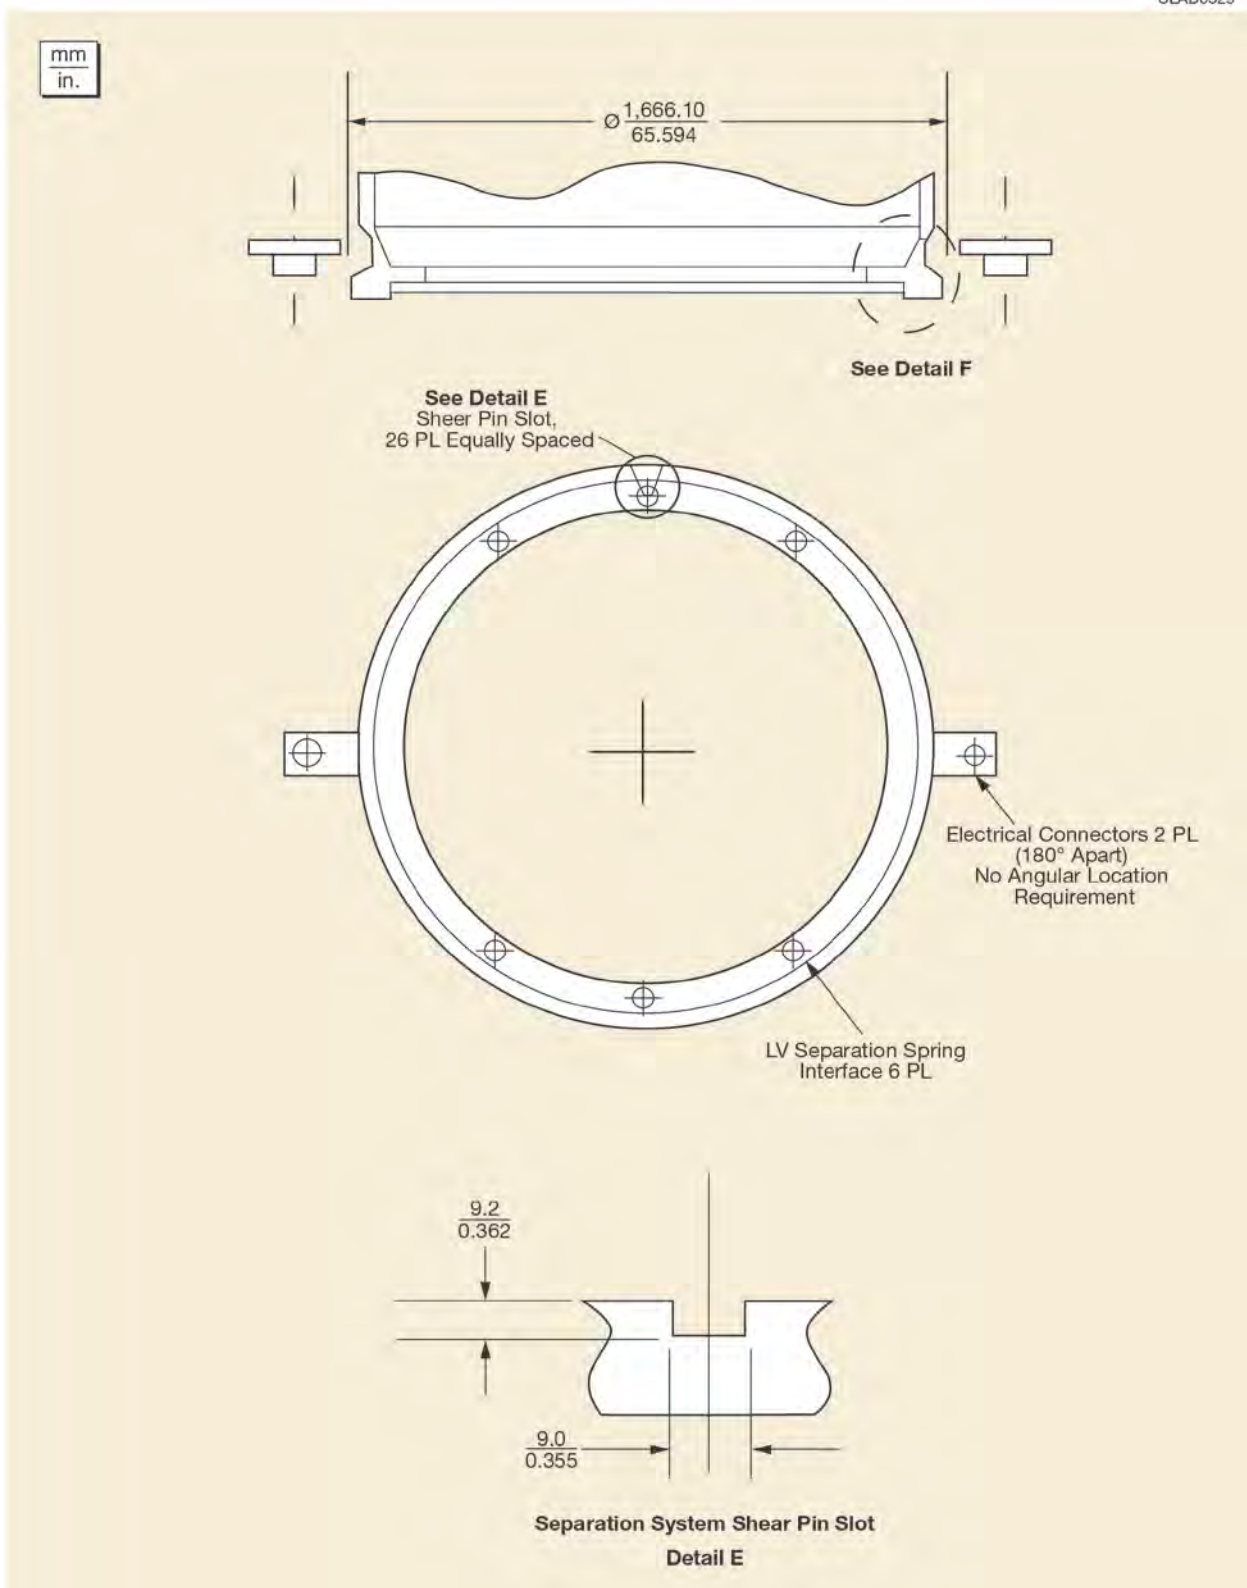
D1666 PLA Spacecraft Interface Dimensional Constraints
